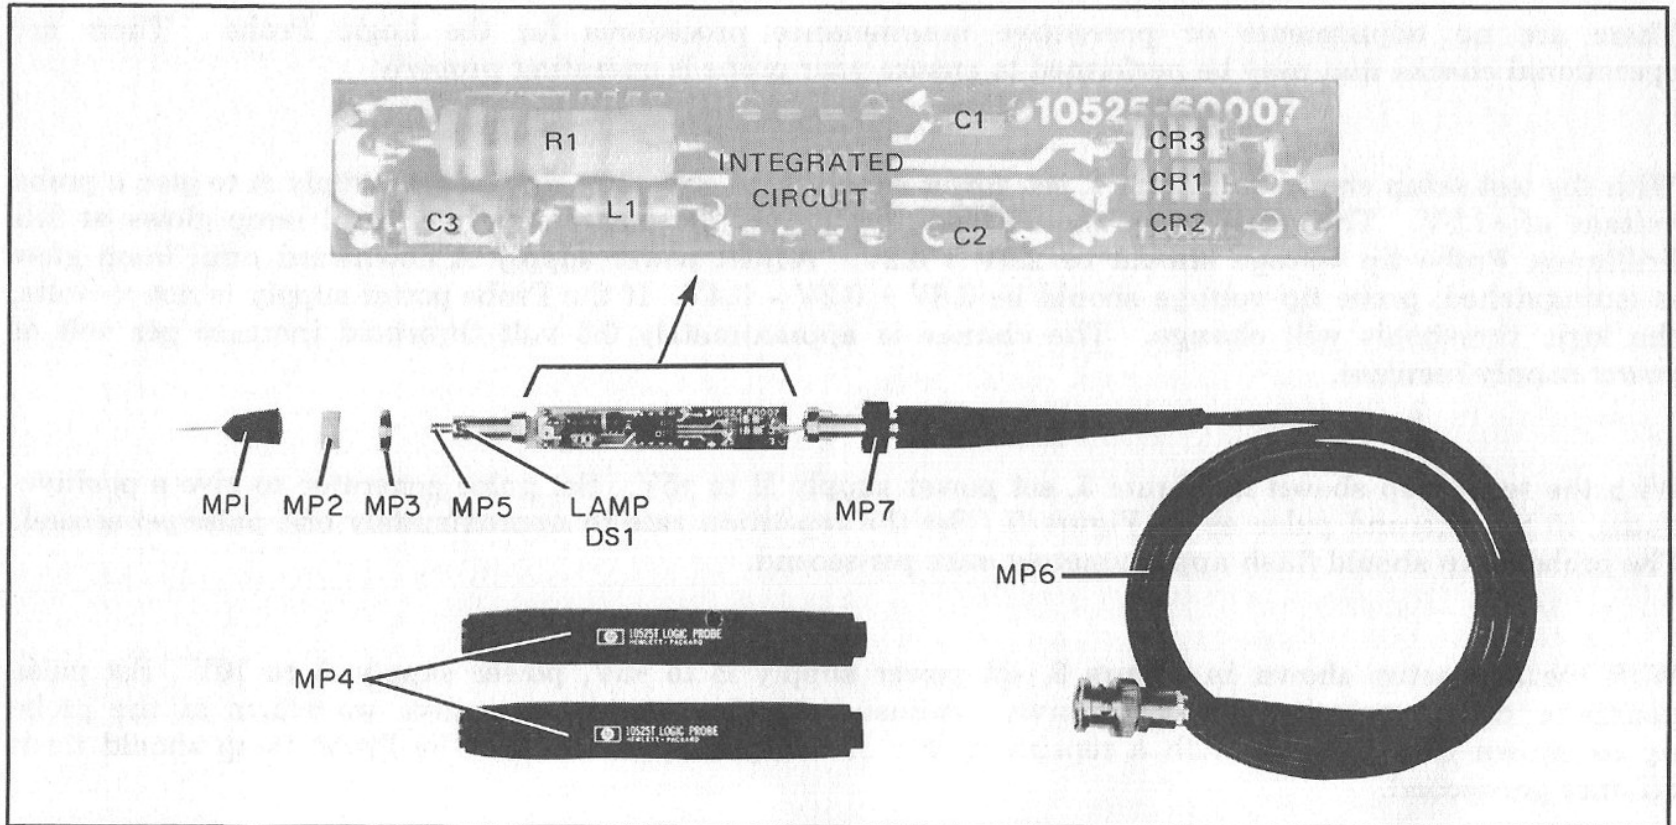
shows the probe parts. To take the probe apart follow these steps:
